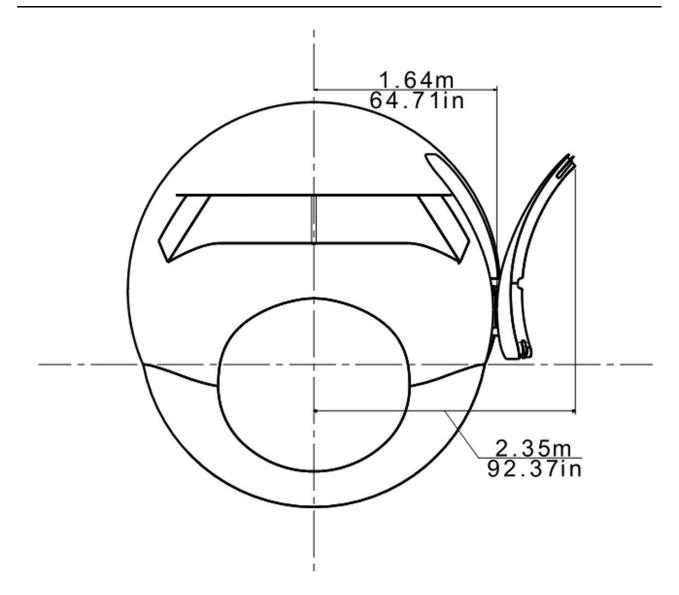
Passenger entry door clearance -2 (Sheet 1 of 1)
